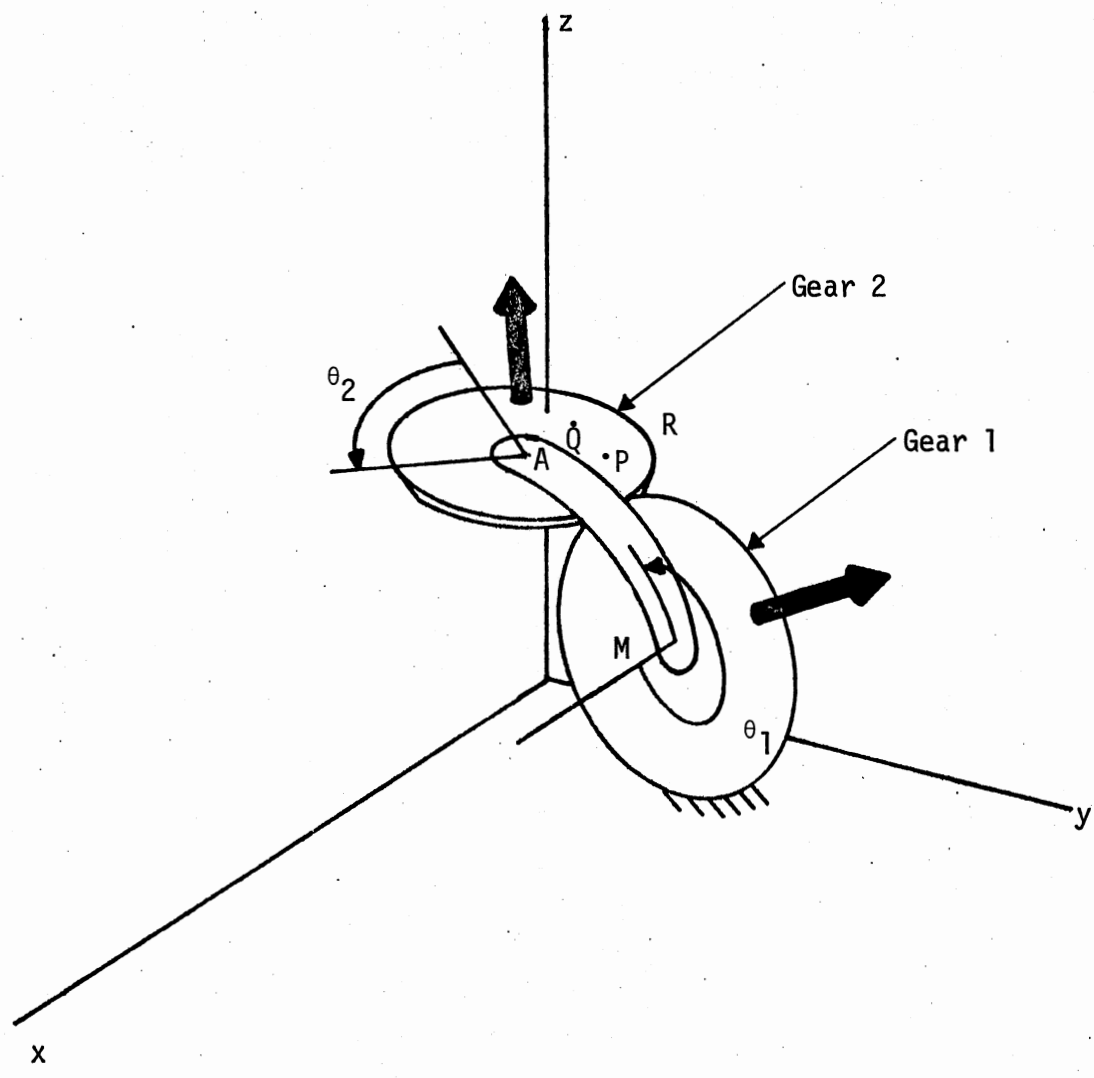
Schematic of Geared Spherical Cycloidal Crank Mechanism
